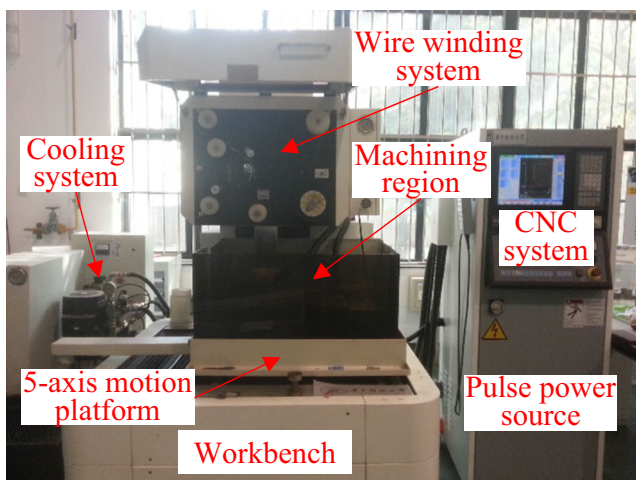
The physical map of 5-axis low-speed wire electrical discharge machine tool
